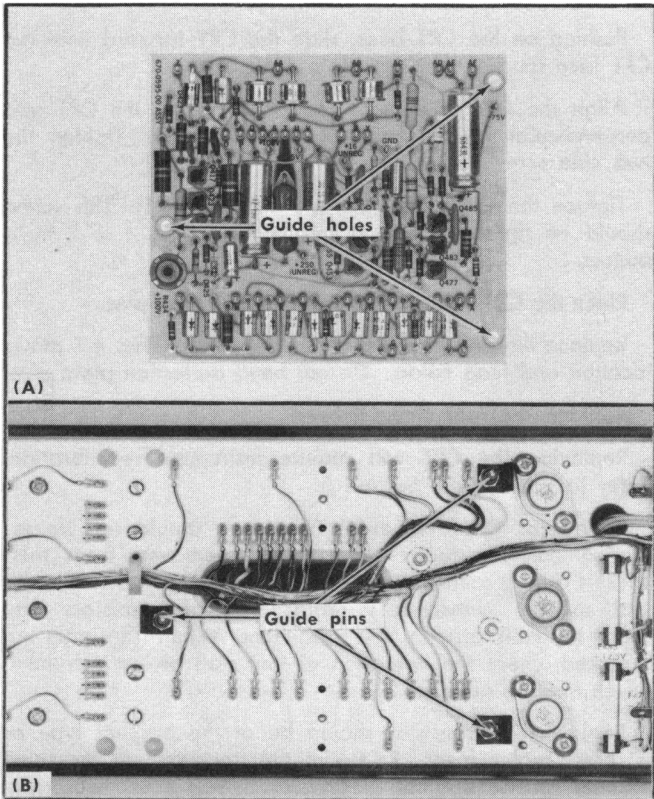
(A) Circuit board guide holes and (B) chassis guide pins.
